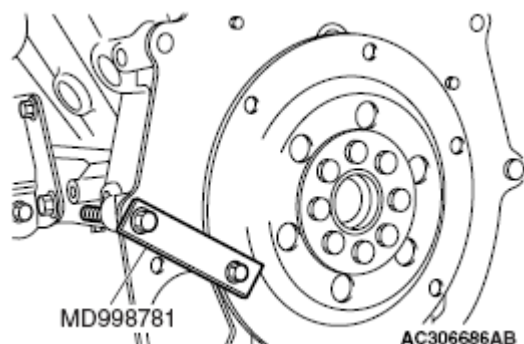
Securing Drive Plate Using Special Tool MD998781
